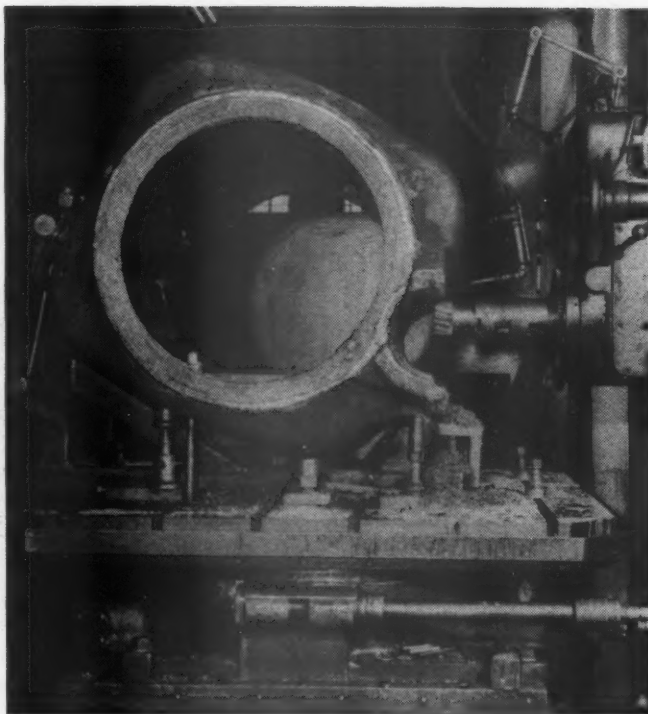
Milling the axle bearing spline—The weld build up is shown both on the face of the large armature bore and the bearing-face bore
